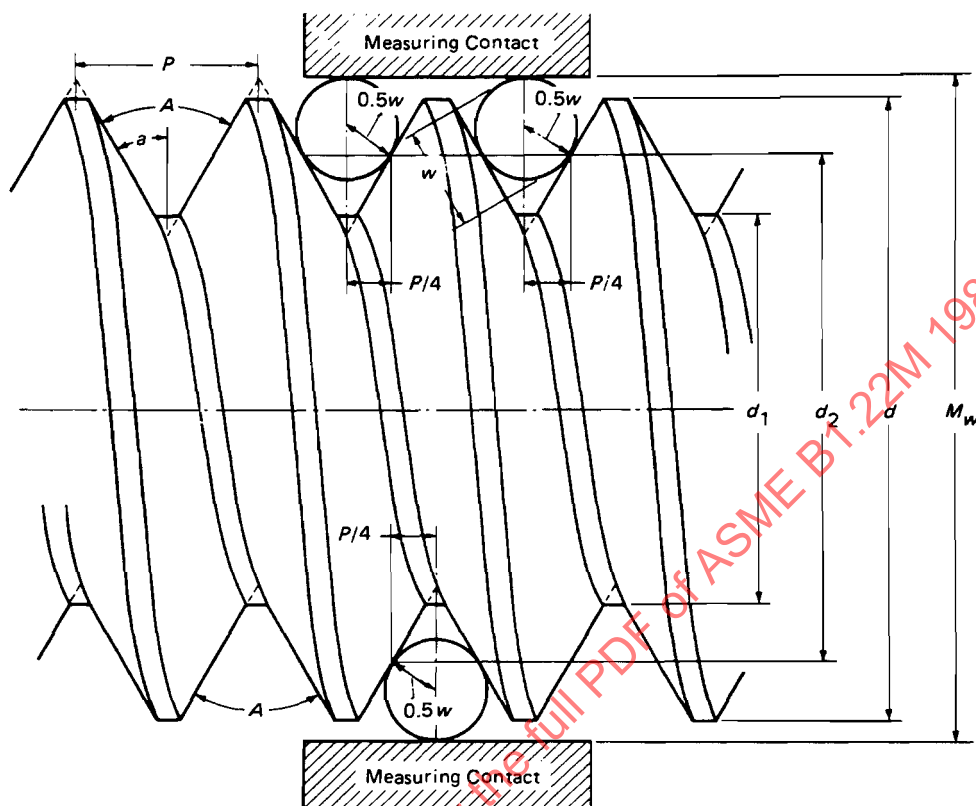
A THREE-WIRE METHOD OF MEASURING PITCH (THREAD-GROOVE) DIAMETER OF THREAD PLUG GAGES
